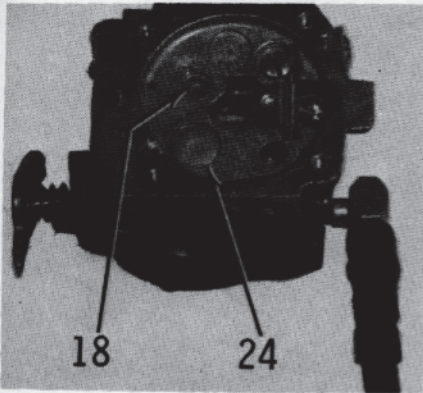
View showing location of welch plugs (18 & 24 - Fig. S12).
